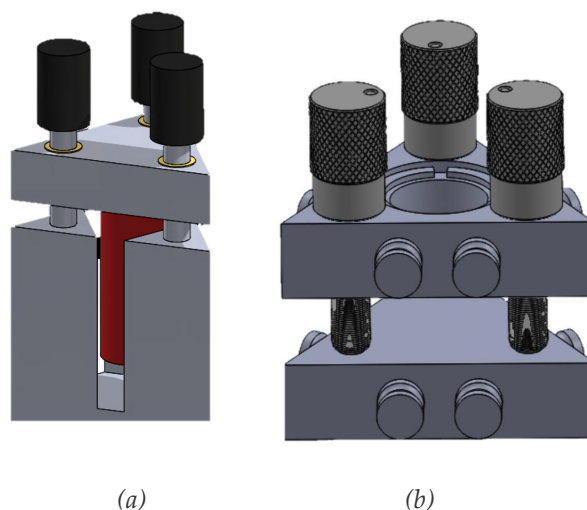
a) Initial design of the mechanical structure adjusted to fit the tube scanner. b) Final design of the structure.
